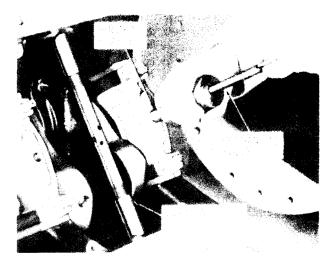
Remouing main bearir, g cap using crankcase spreading tool, mechanical adapter and mechanical puller.
